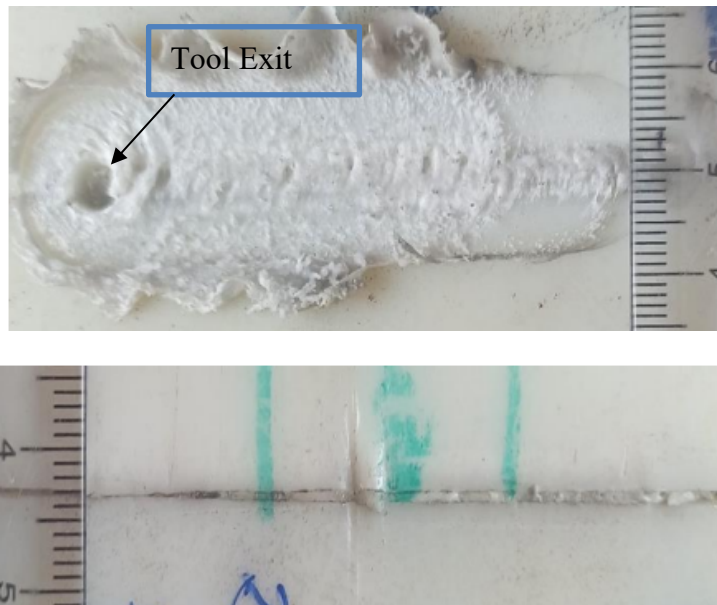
Feed at 30 mm/min. (Front & Back View)
